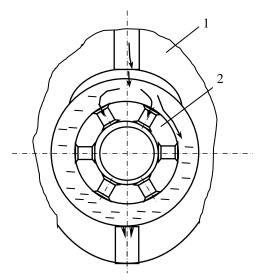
Bearing with rotating rings: 1 – turbocharger housing; 2 – rotating rings.
